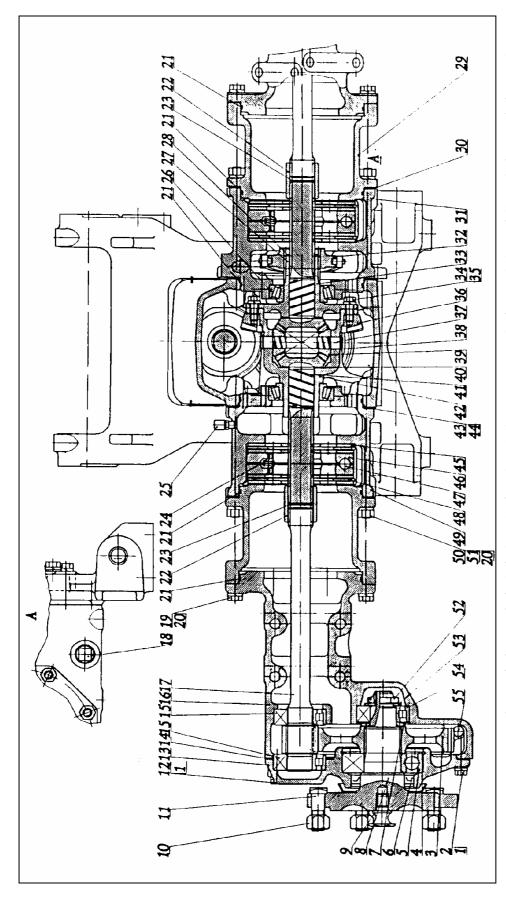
Rear axle cross-section (description) 1- screw; 2- spring washer: 3- driven toothed wheel: 4retaining ring; 5- ball bearing; 6- sealing; 7washer; 8- hub; 9transport grip; 10- nut; 11- hub screw; 12screw; 13- cover; 14washer; 15- ball bearing; 16- spur gear drive sheath; 17- spur gear drive shaft; 18inspection/filling plug; 19- screw; 20- spring washer; 21- o-ring; 22connecting sleeve; 23retaining ring; 24pressure disc spring; 25body vent; 26- conical bearing; 27- sleeve; 28retaining ring; 29attachment; 30- sealing; 31- brake body (left); 32lock clutch; 33differential gear cover; 34- screw; 35- spring washer; 36- crown disc; 37- planet gear bolt; 38retaining ring; 39- planet gears; 40- slide washer; 41- crown wheel; 42differential gear body; 43- adjustment washer I; 44- adjustment washer II; 45- friction disc; 46pressure disc; 47- ball; 48- intermediate disc; 49- brake body (right); 50- stud bolt; 51- nut; 52- nut; 53- bearing washer; 54- roller bearing; 55- drain plug.
